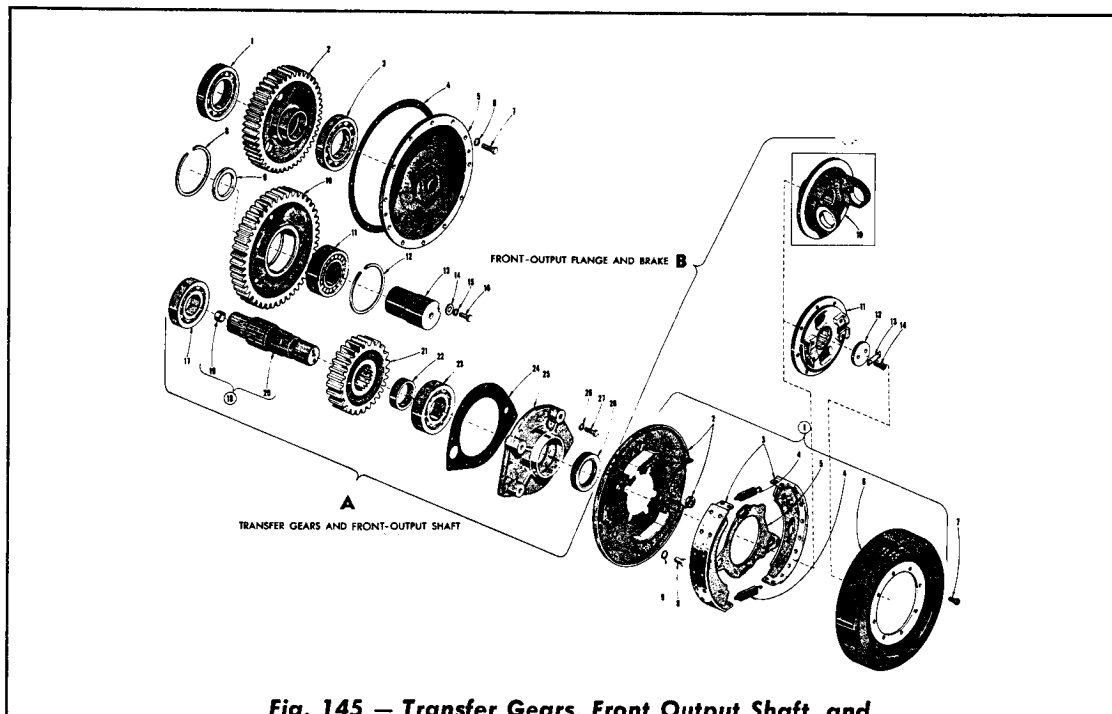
Transfer Gears, Front Output Shaft, and Front Output Flange and Brake — Legend
